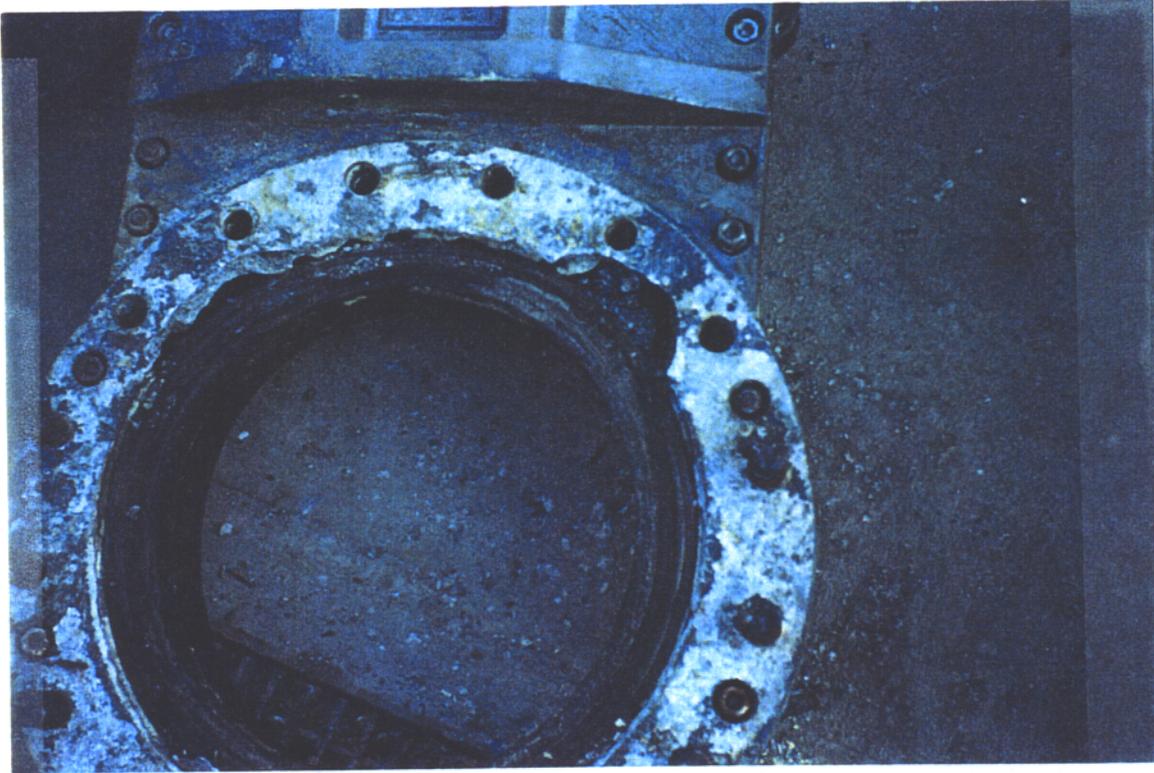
Aluminum Knife Gate Valve Body Failure
